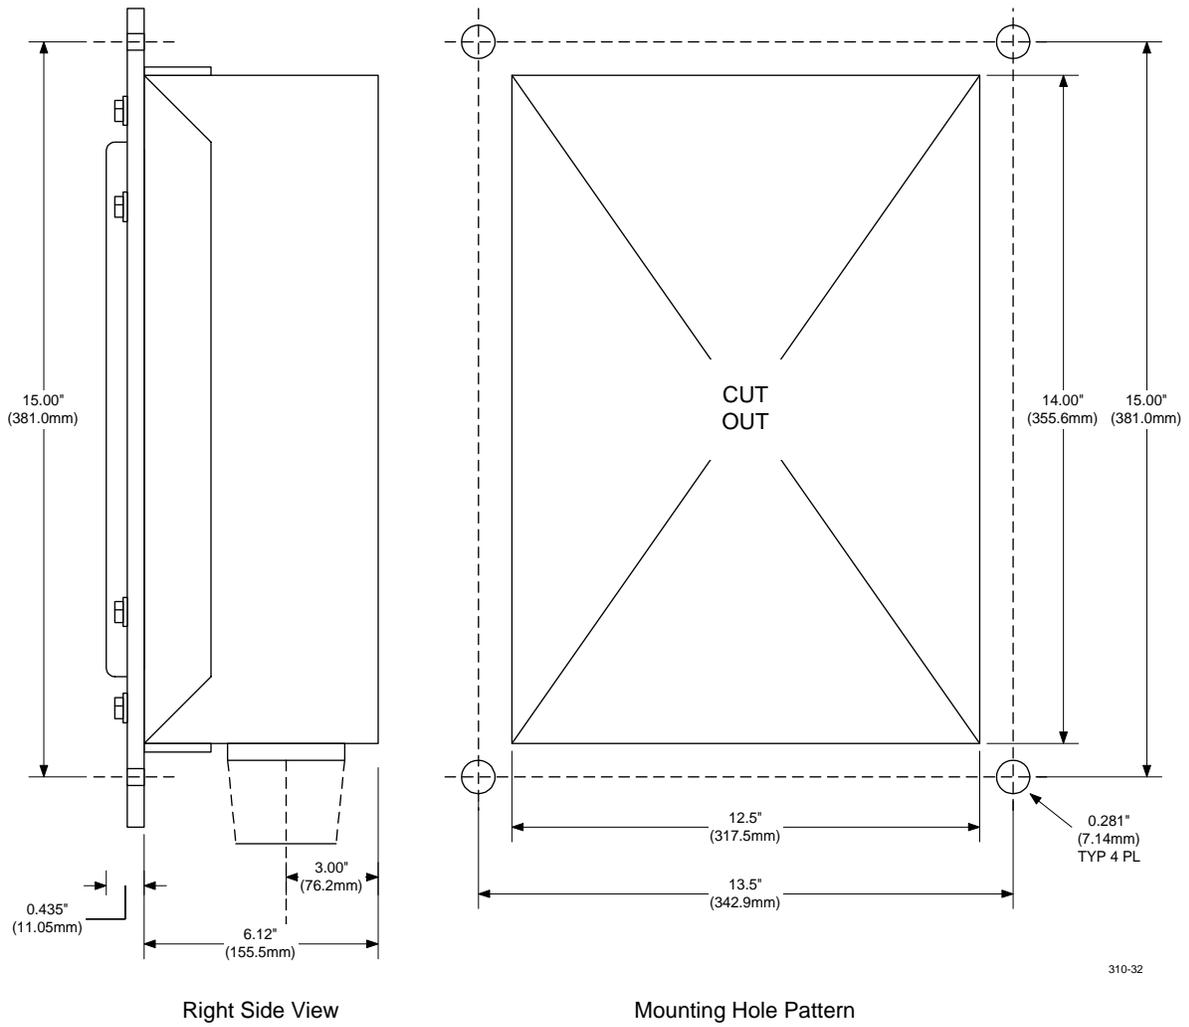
Flush Mounting Dimensions, Side View and Mounting Holes
